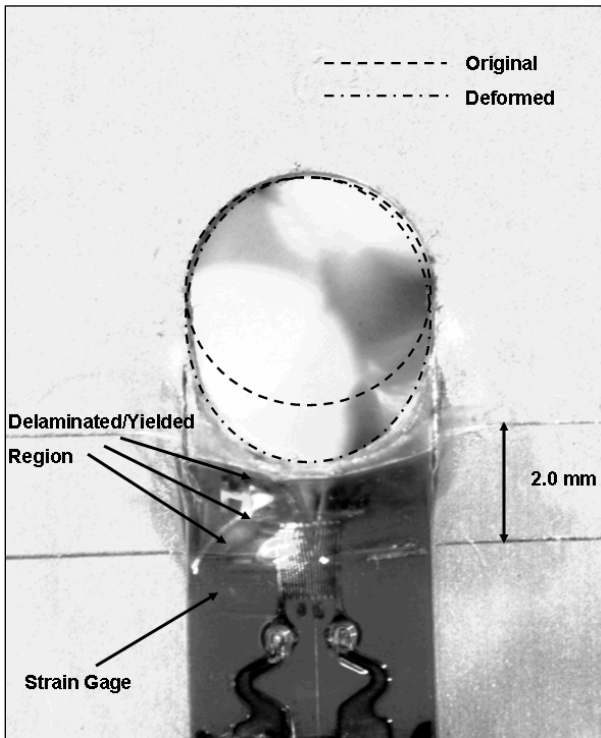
Typical specimen showing failure in a bearing mode. Note the characteristic elongation of the fastener hole and the delaminated/yielded region with both in plane and out of plane deformation.
